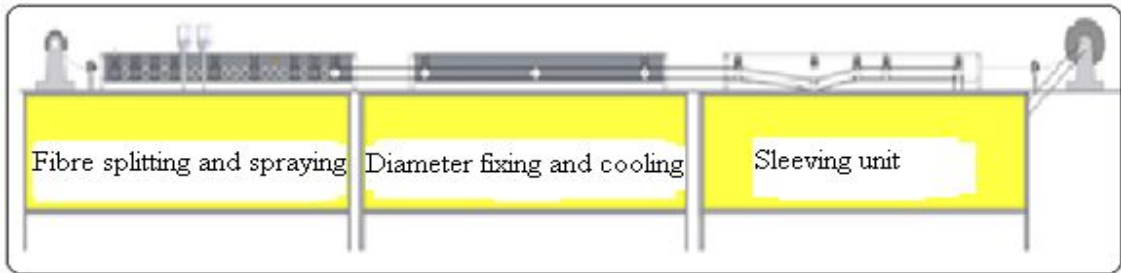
(b) Side view of three stages of automatic PY producing machine
